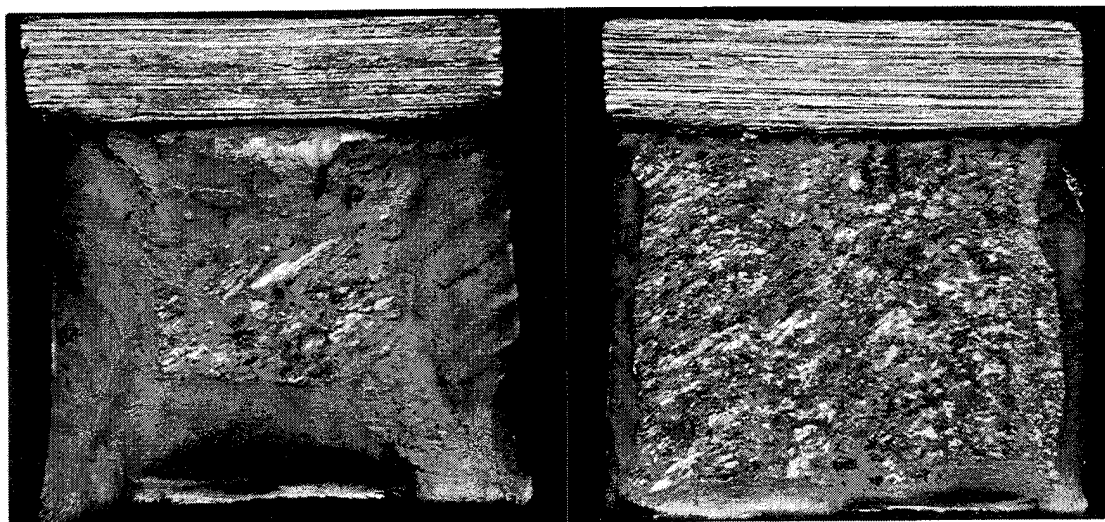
MV1 Ductile and Brittle Fracture Surfaces (6.4 x)
